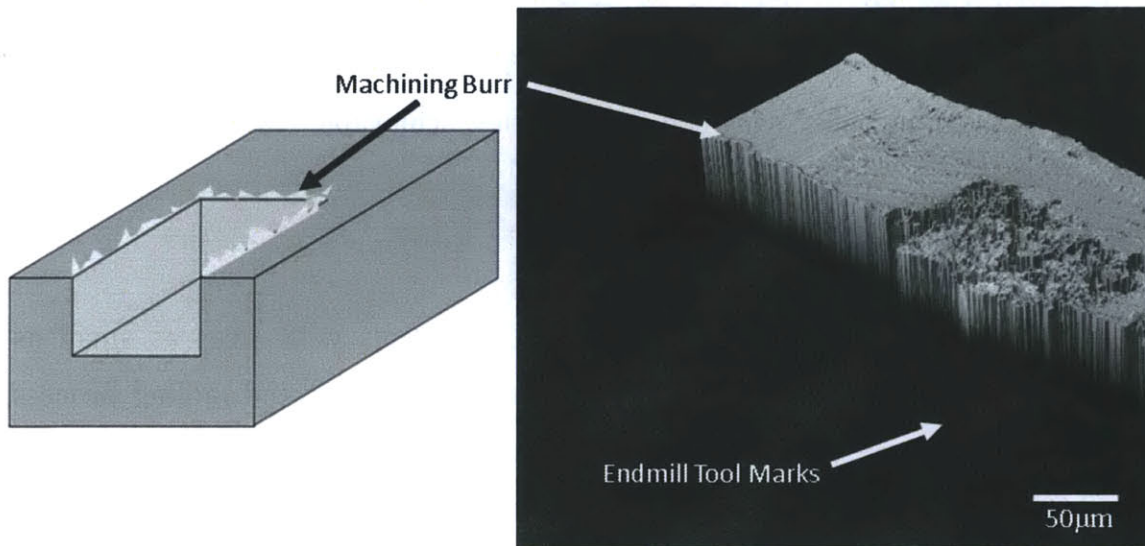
Cross sectional depiction of burrs on the edge of a possible machined channel (left). An interferometer image of a machined feature showing tool marks and possible burrs (right).
